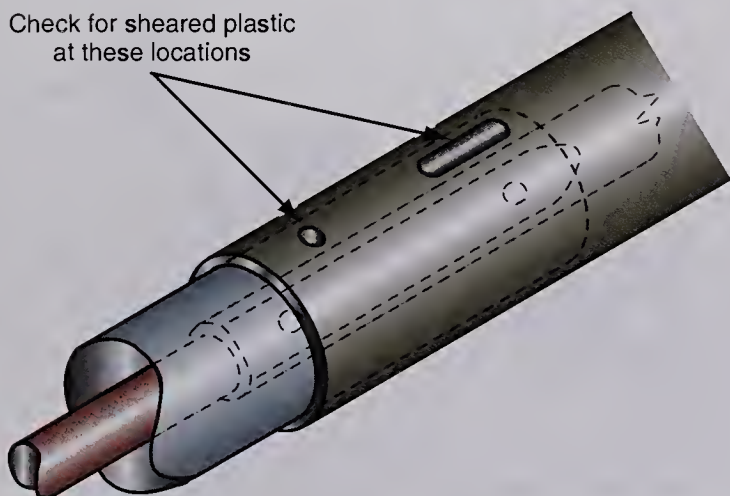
Inspecting for sheared plastic in jacket openings.
